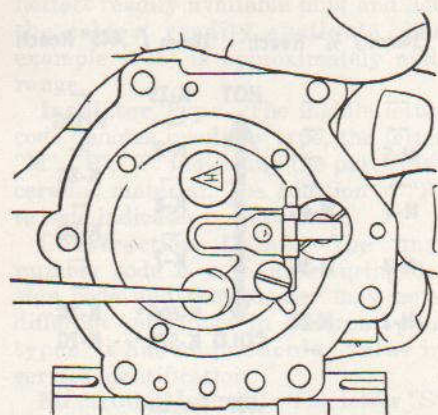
A punch can be used to remove plugs from carburetor as shown, after carefully drilling a small hole in plug.
